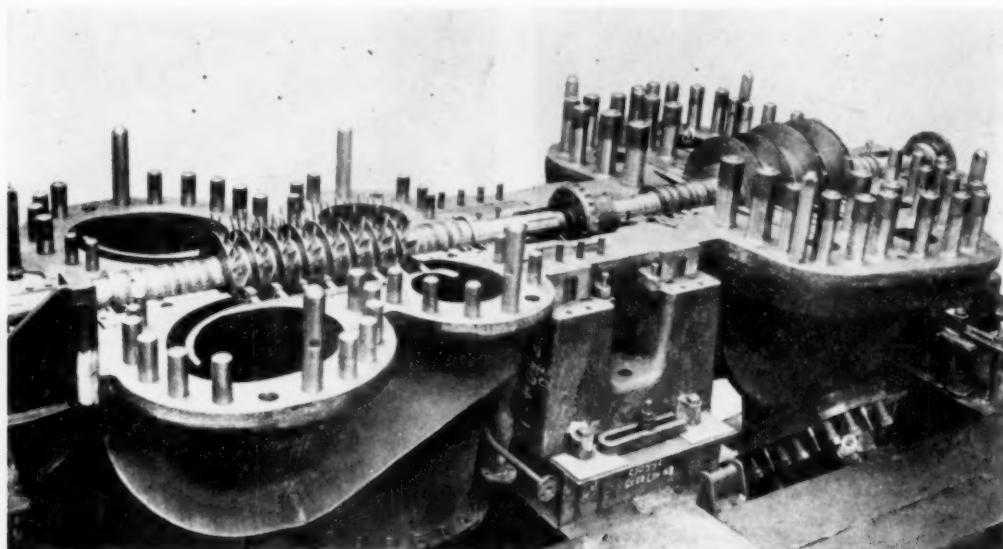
SECOND AXIAL MEDIUM-PRESSURE COMPRESSOR AND RADIAL HIGH-PRESSURE COMPRESSOR FOR PARIS SET
